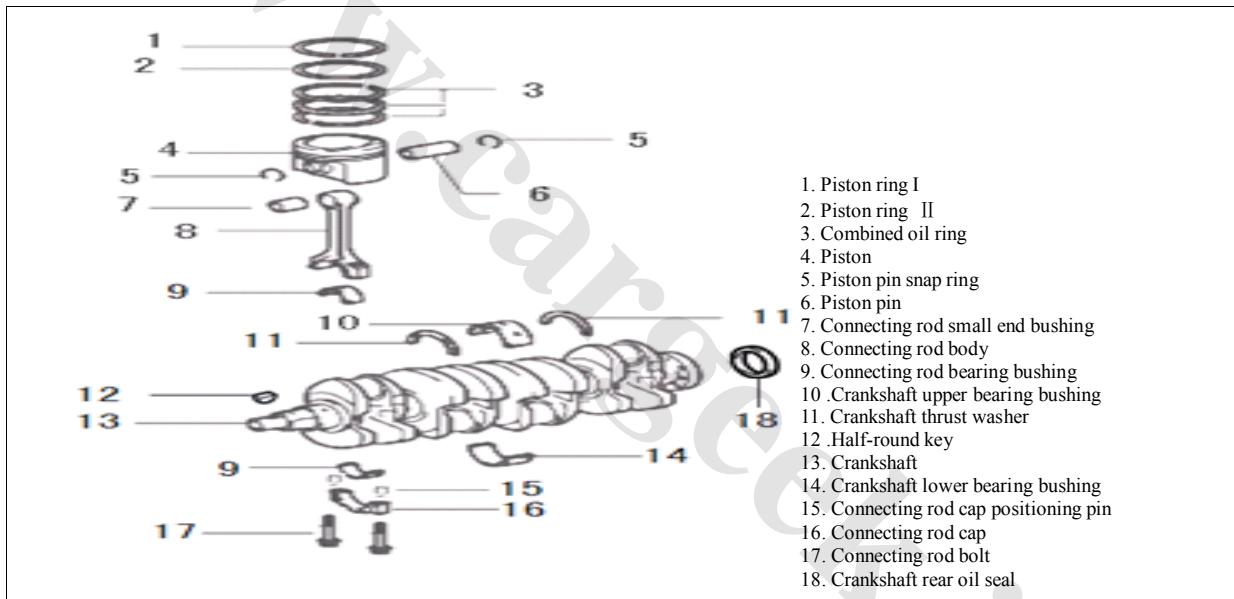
Piston, piston ring, connecting rod and crankshaft assembly
